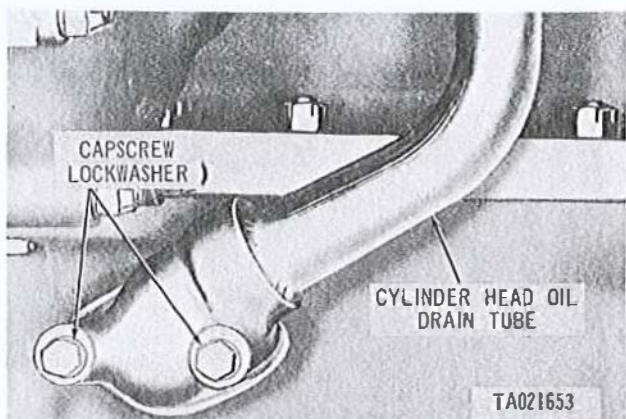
Disconnecting or connecting left rear cylinder head oil drain tube.
